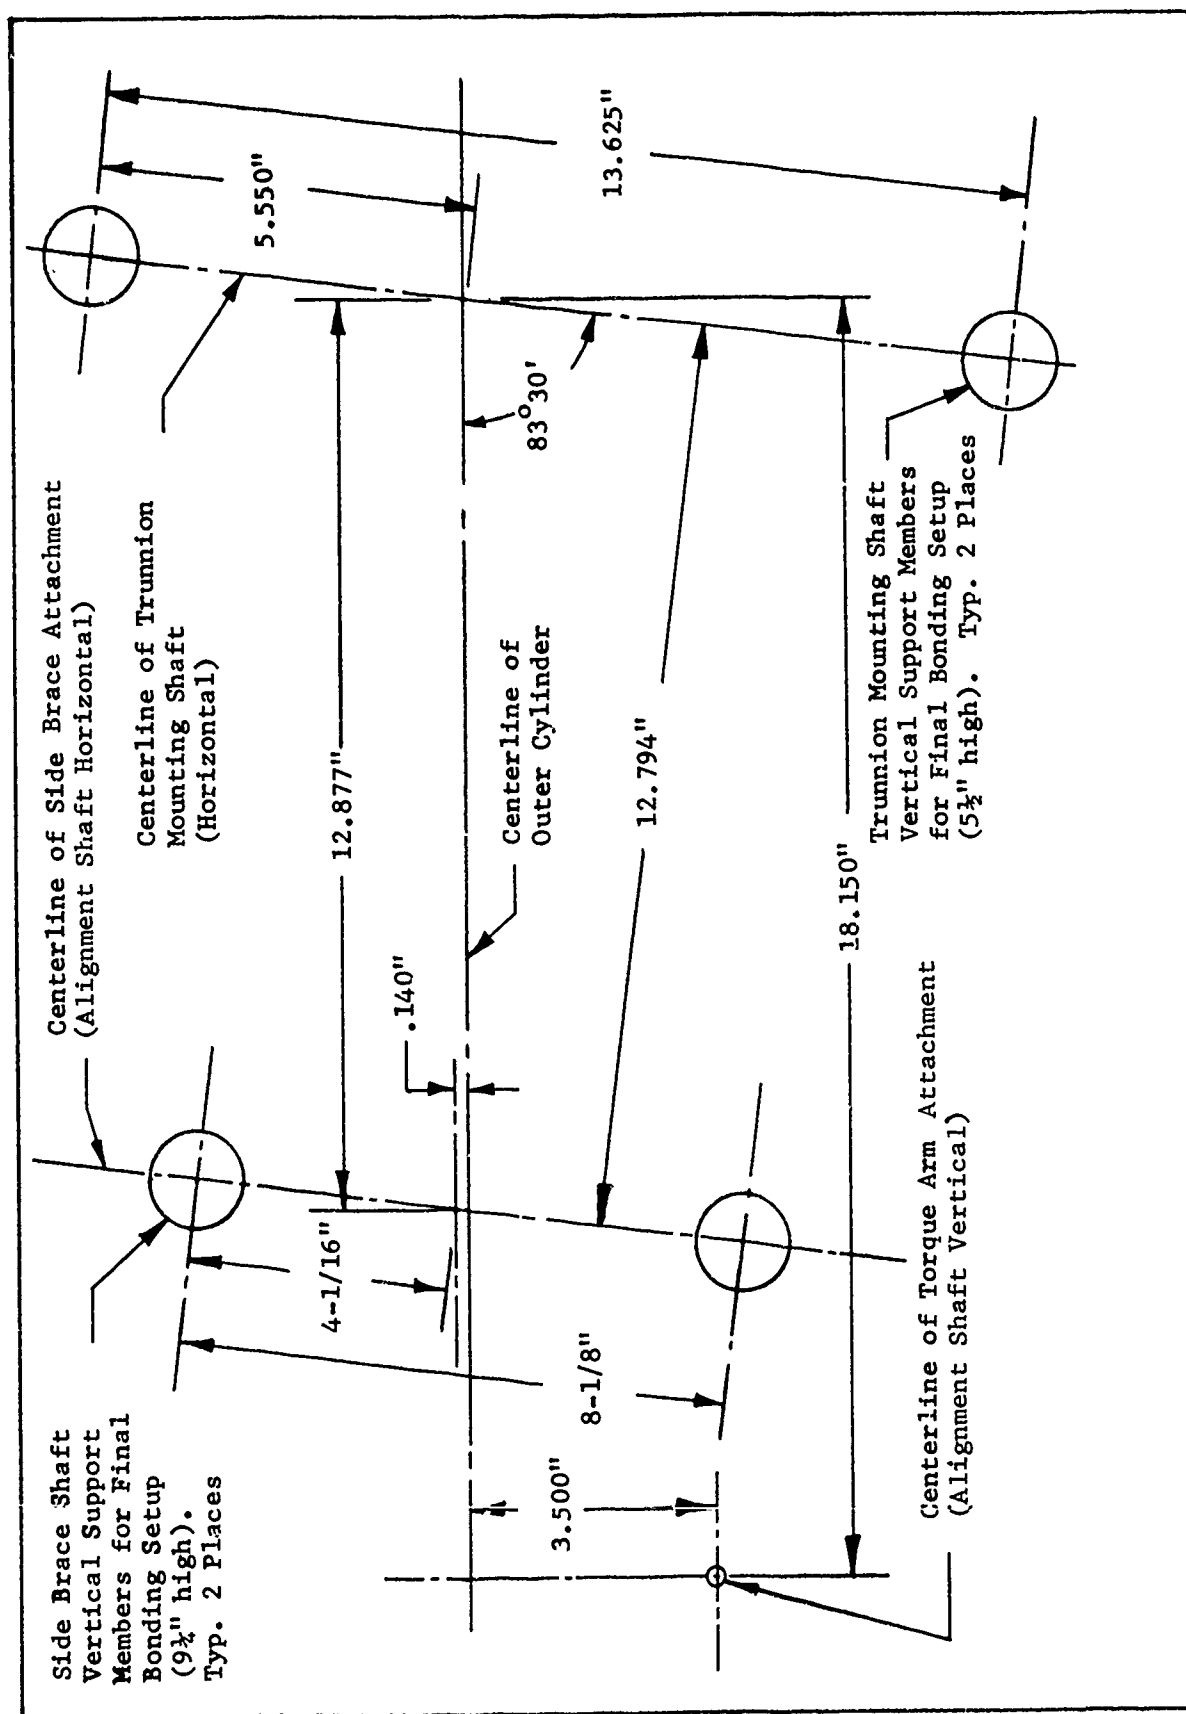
Final Assembly Bonding Arrangement, A37B Landing Gear
